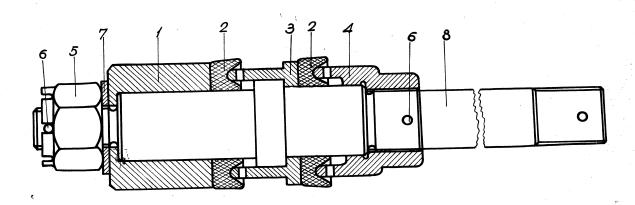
RECUPERATOR PISTON — ASSEMBLY
